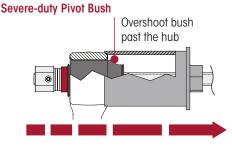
Severe-duty Bush Tool Configuration AFTER overshoot
